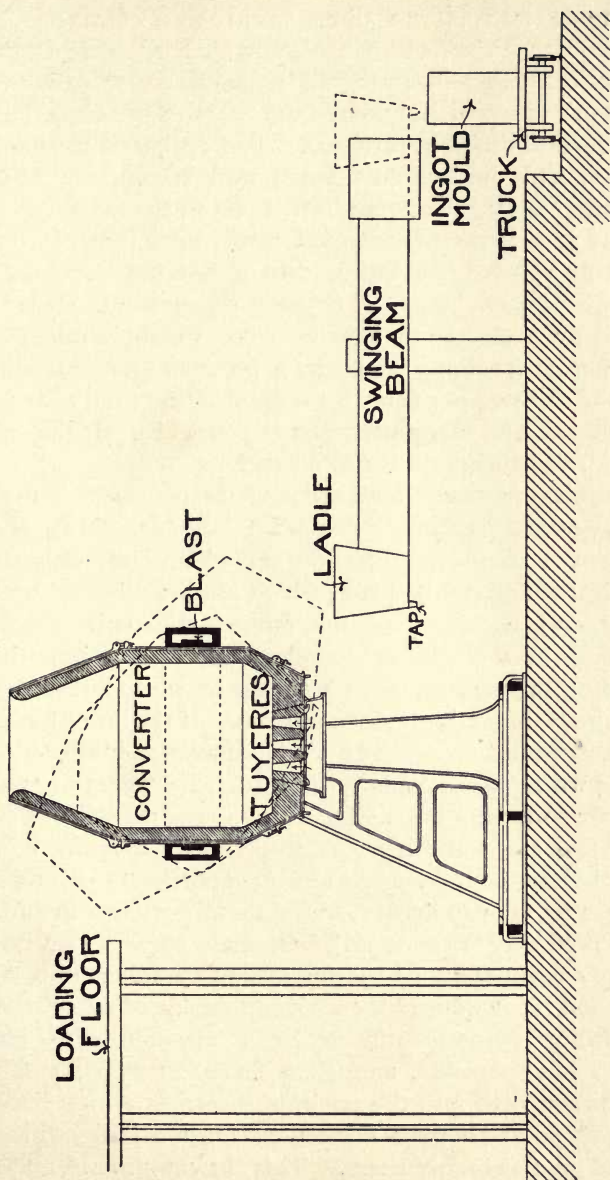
Bessemer Converter, Ladle, and Ingot Mould.
